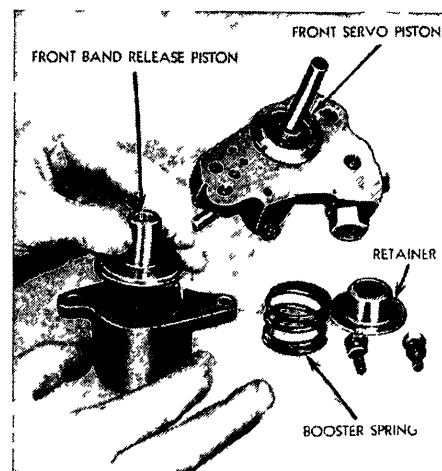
After removing booster spring, retracting spring retainer and retracting spring, remove front band release piston from cylinder
